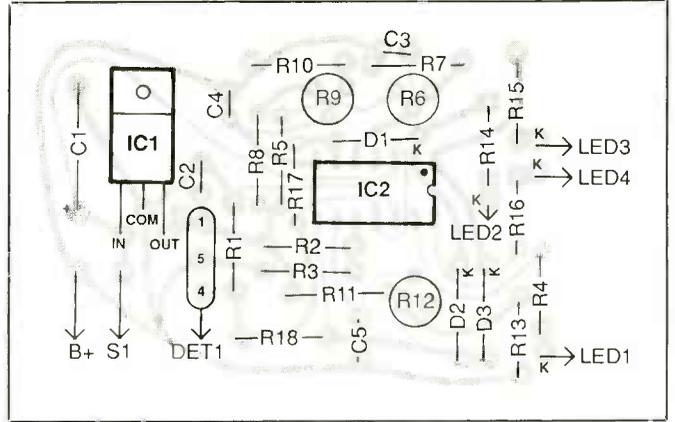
Wiring guide for pc board. Use this as a layout guide if you point-to-point wire the circuit.
